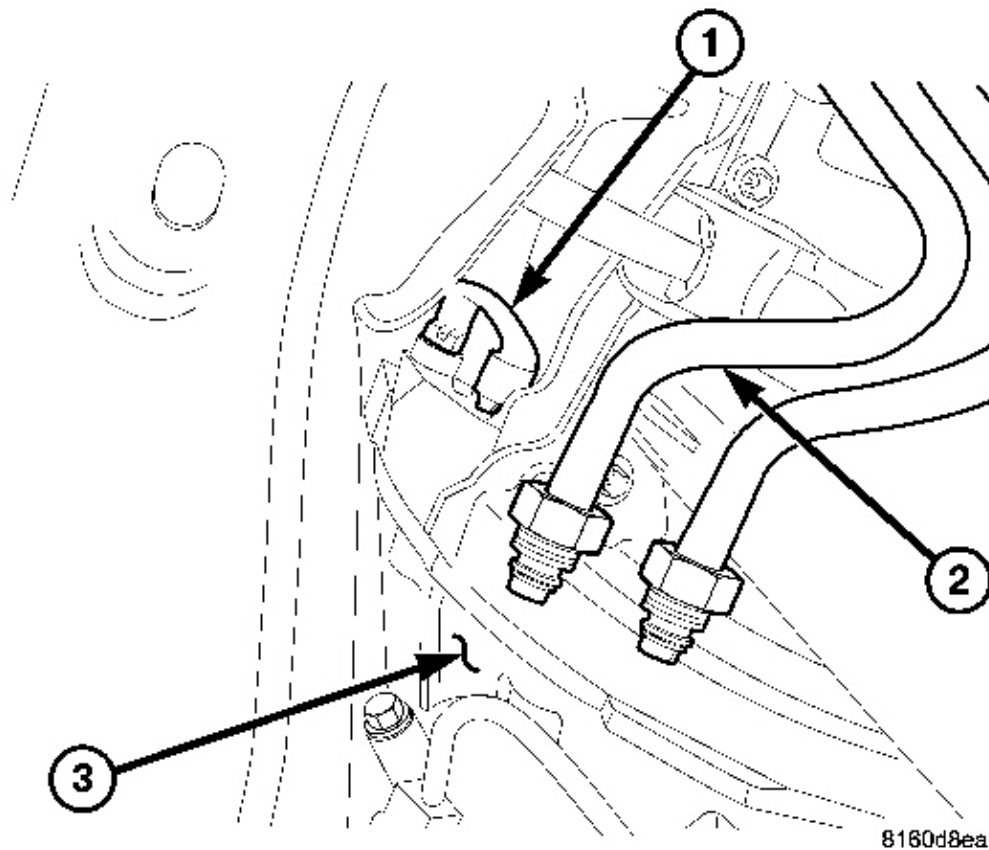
#9102 Crankshaft Lock, Transmission Cooler Lines & Transmission
